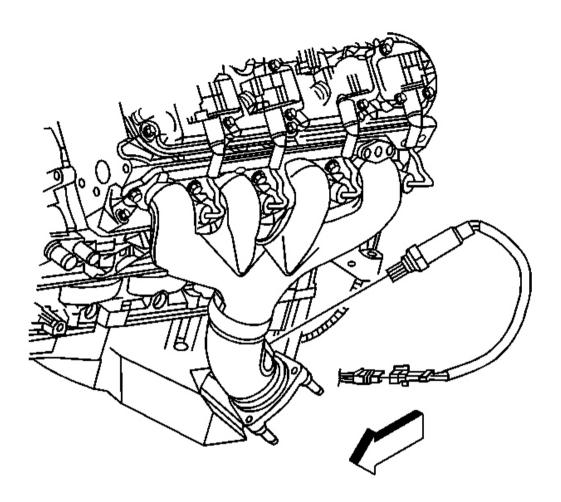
Oxygen Sensor Electrical Connector Courtesy of GENERAL MOTORS CORP.
